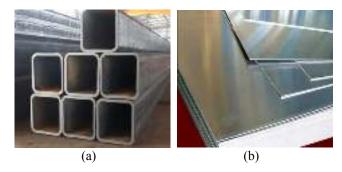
The actual components of the machine (a) mild steel square hollow and, (b) aluminum sheet plate
